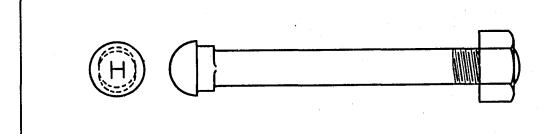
TYPICAL HEEL BOLT . (MARK H' SHOWN.)
